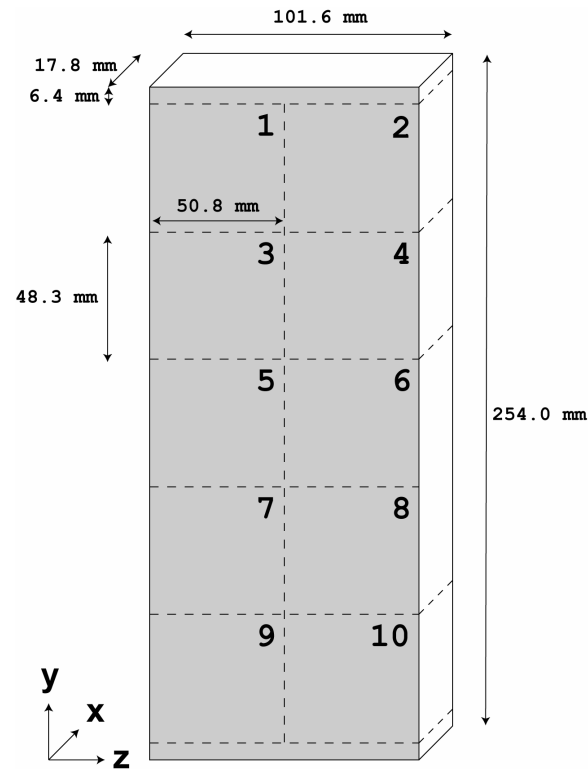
Coupon layout in laser peened 316L plate (uniformly treated surface shaded)
